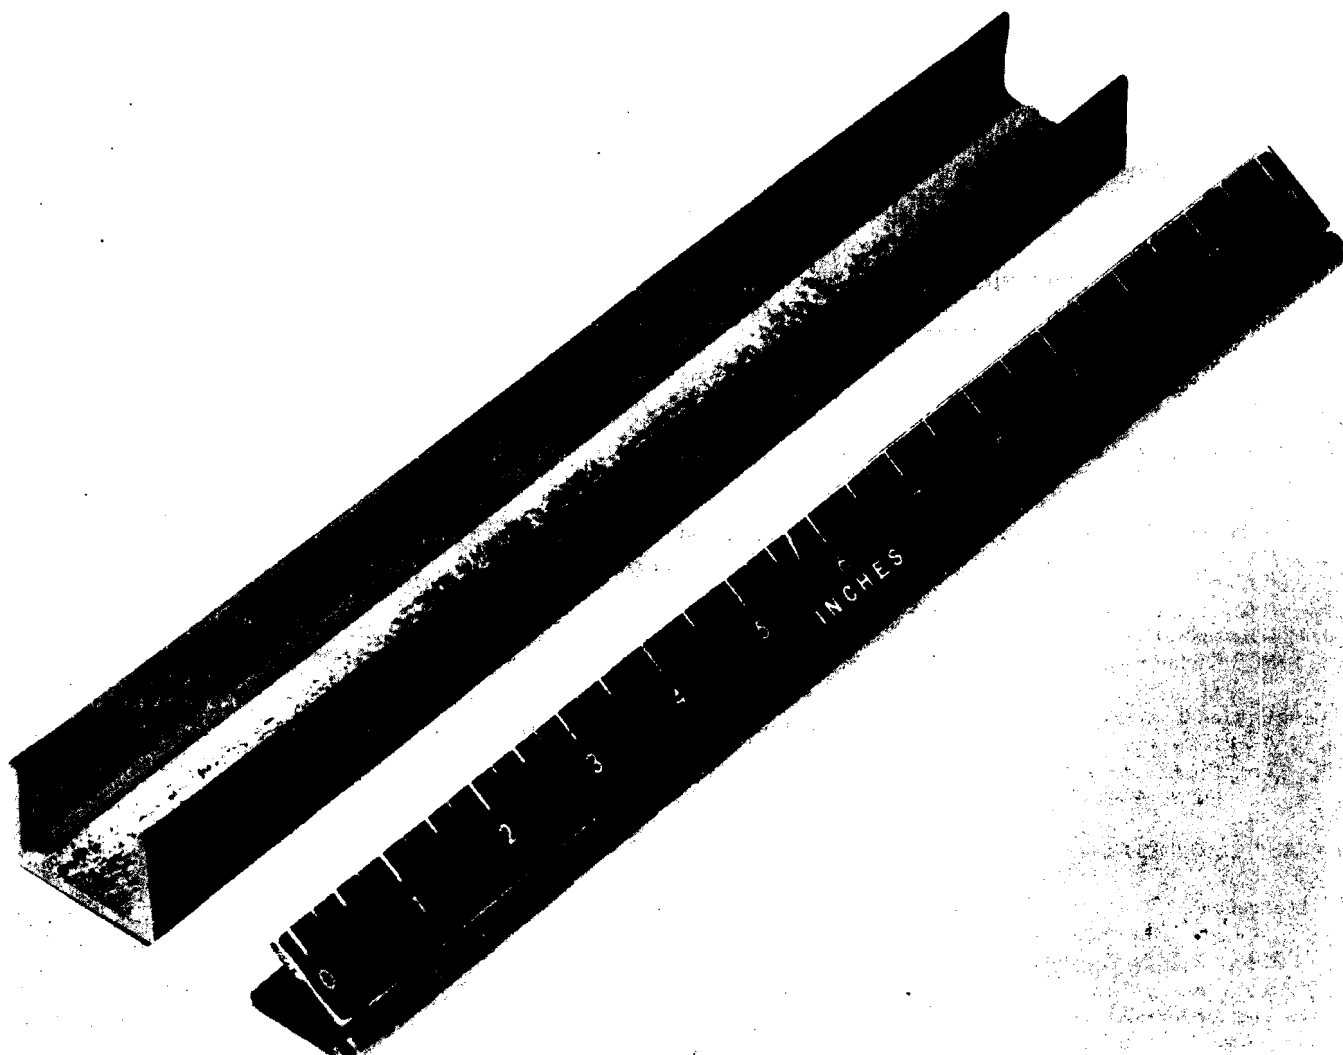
AS-EXTRUDED BERYLLIUM CHANNEL SHAPE⁽²⁵⁾
